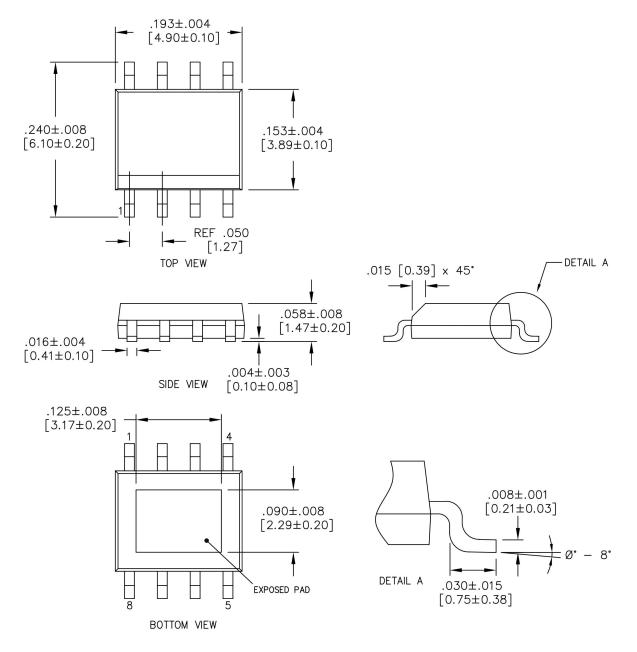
SOIC-8NE Plastic Package Dimensions (all dimensions in inches [millimeters])
